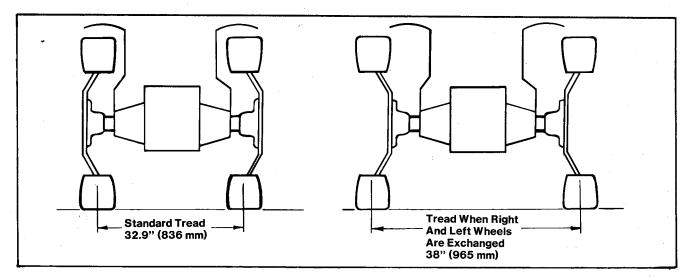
Rear Wheel With 8 x 18 R1 Tires
